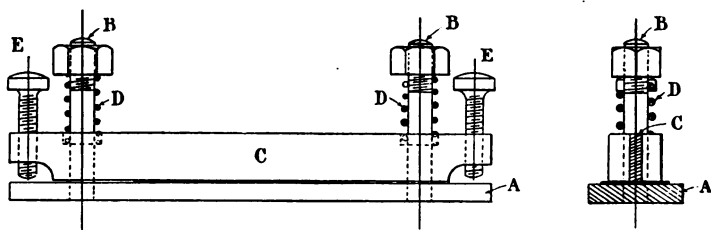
Block for Cutting Rubber Test-pieces under Constant Pressure.
